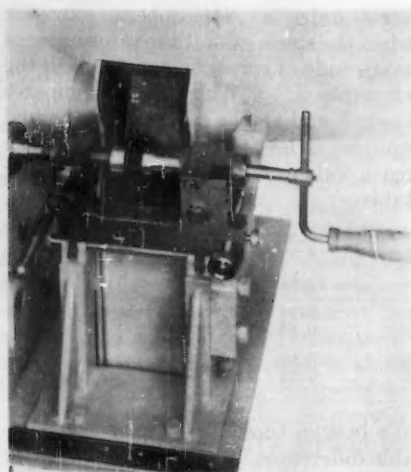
Jig Attachment Used in Buffing Compression Set Specimens.
